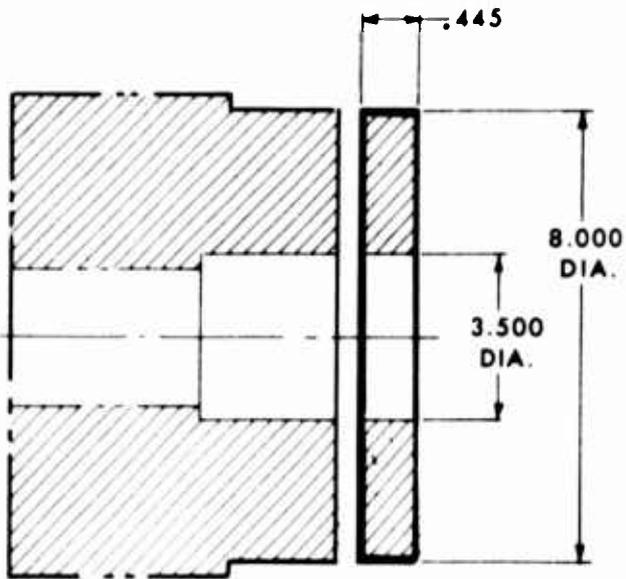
RG351-11181-104 Machine Operation Drawing.
